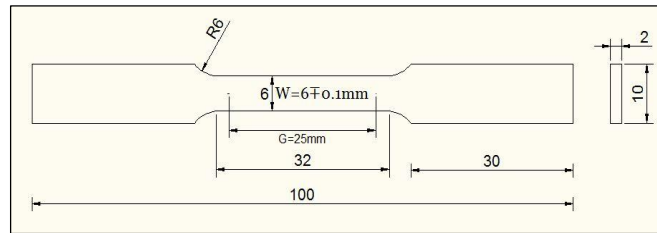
Standard dimensions of the tensile test specimen (All dimension in mm) [33]
